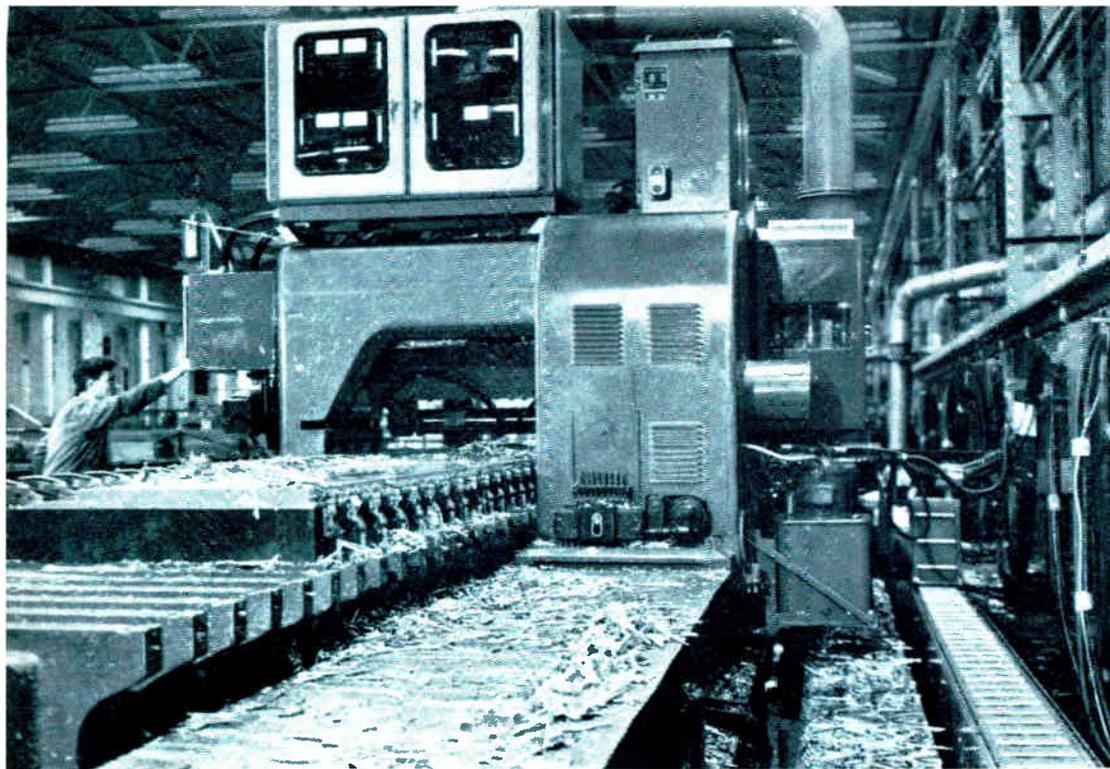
A skin-milling machine fitted with A.E.I. Emotrol drive for the crossbeam
